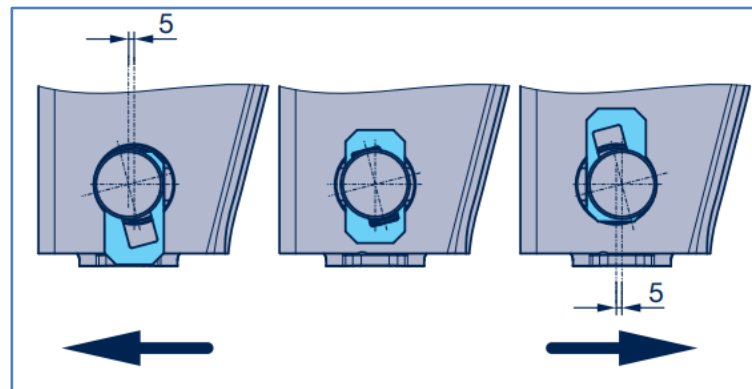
Axle tracking performed with sliding plates on adjustable hanger brackets
